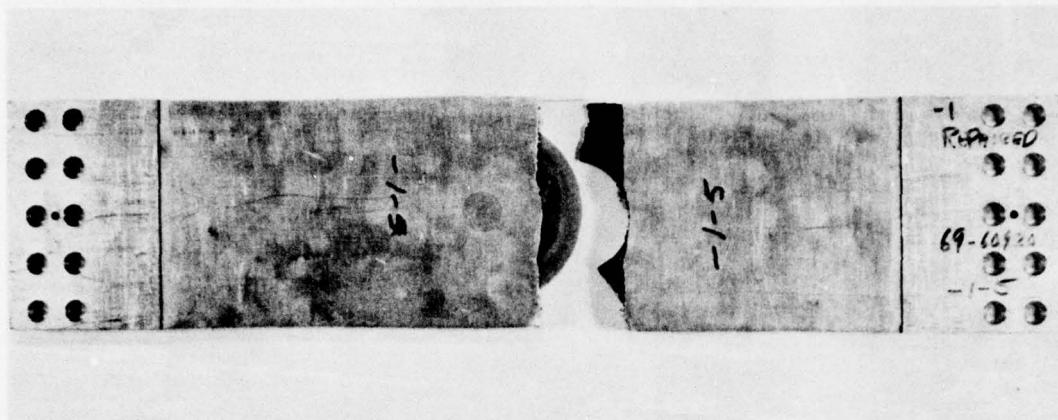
Repaired Aluminum Specimen After Tensile Test—AF127-3 Adhesive
